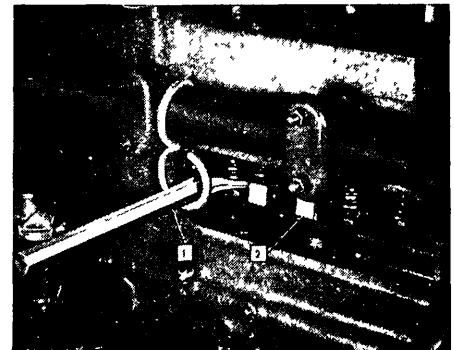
Method of compressing valve springs on 1941-52 Series 10, 40. The adaptors (2) are used to hold up valve lifters when necessary to remove camshaft
